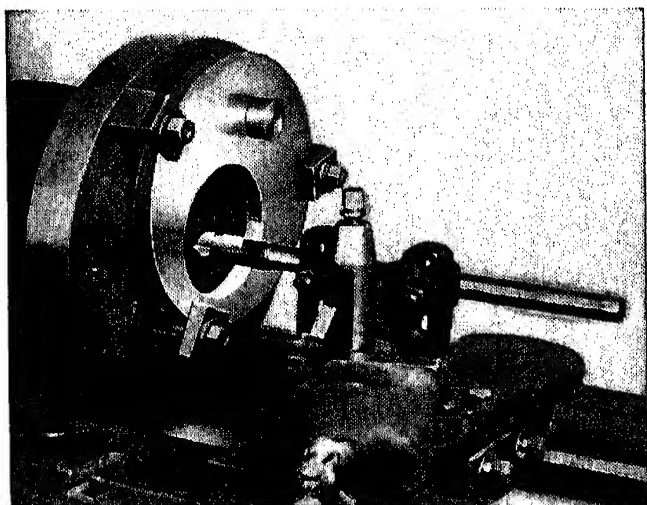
A workpiece clamped to a faceplate for boring an eccentric hole. (Courtesy South Bend Lathe Works.)
